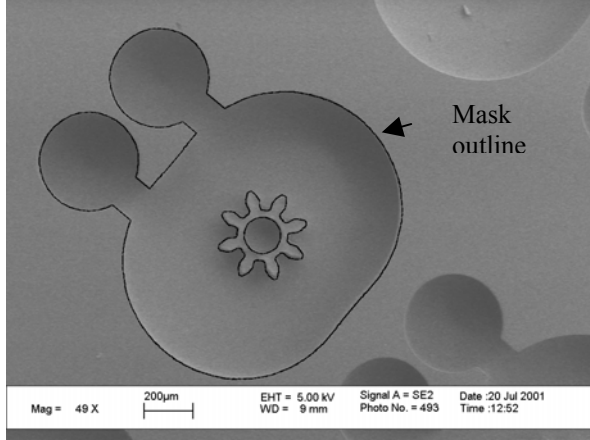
Analysis of fabrication tolerances for the engine housing.
